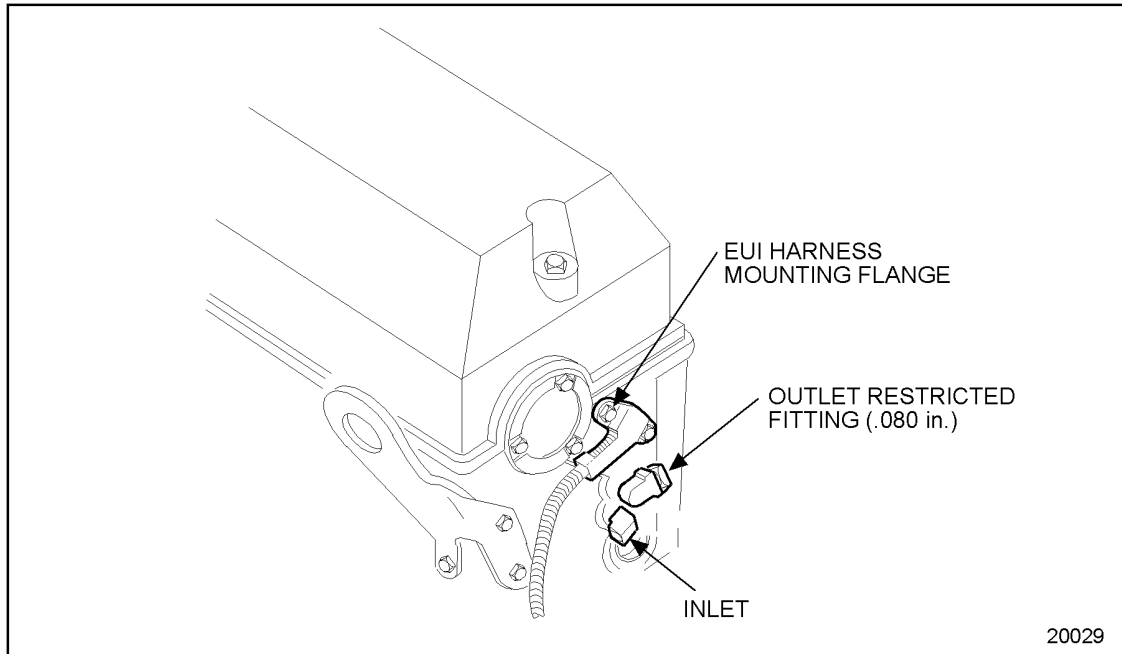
Fuel Gallery Inlet and Outlet Fittings
